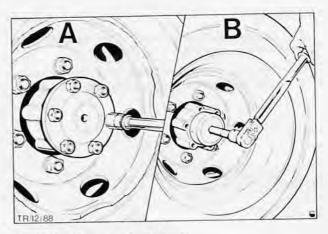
A – Unscrew axle shaft nuts B – Undo locknut with special tool no. 15–029
